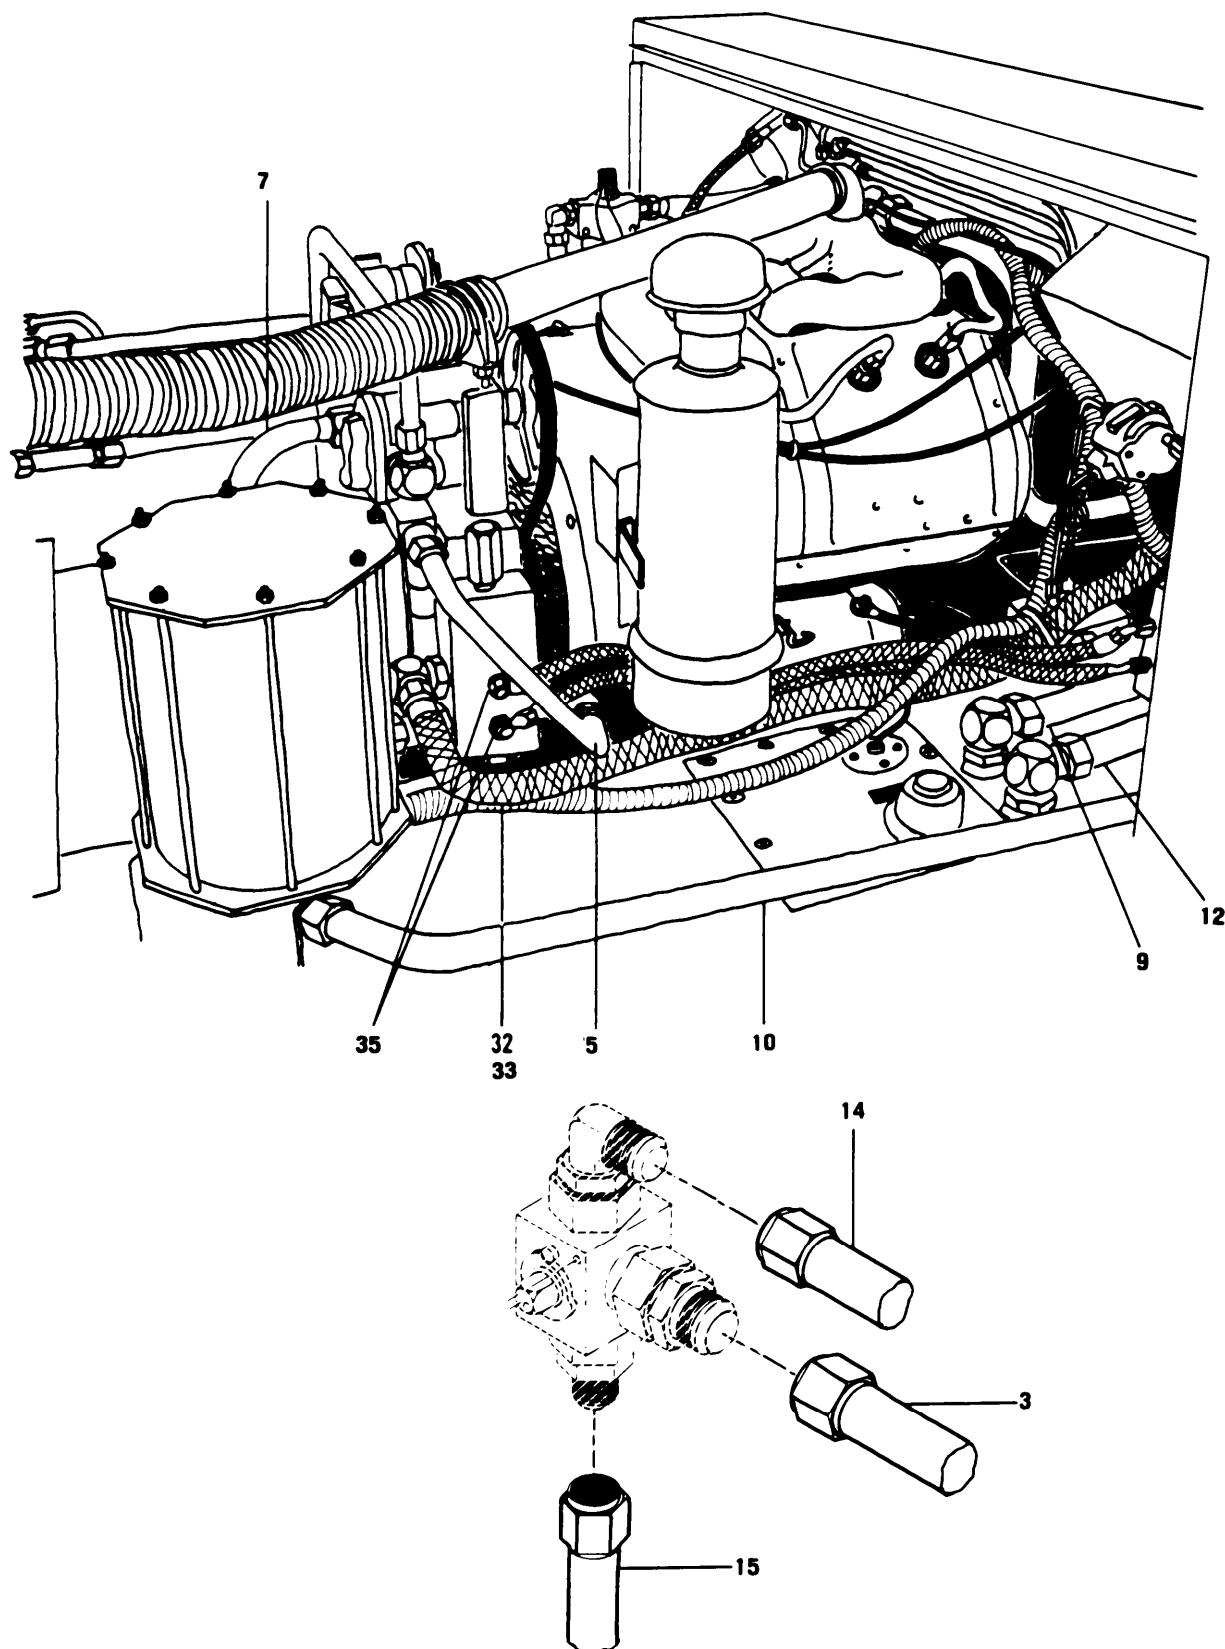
Lines, Tubing, Fitting and Hose Assembly (Sheet 2 of 3)
